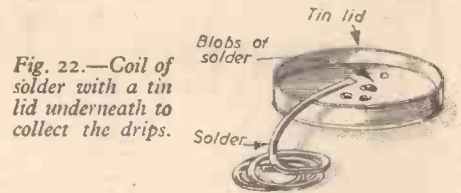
Coil of solder with a tin lid underneath to collect the drips.
